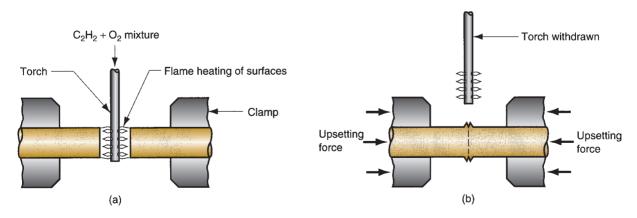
An application of pressure gas welding: (a) heating of the two parts, and (b) applying pressure to form the weld.
